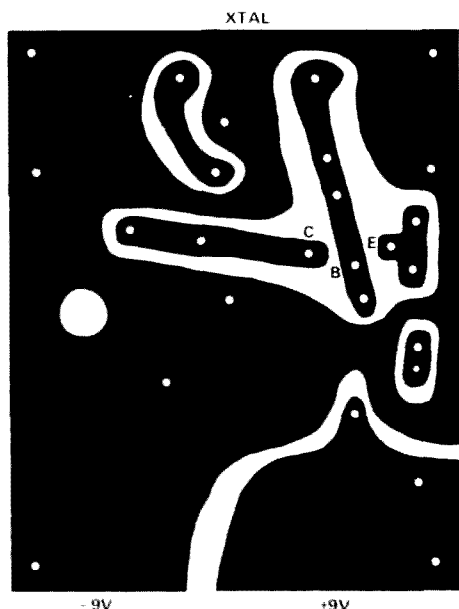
Full size layout of crystal oscillator P.C. board.
